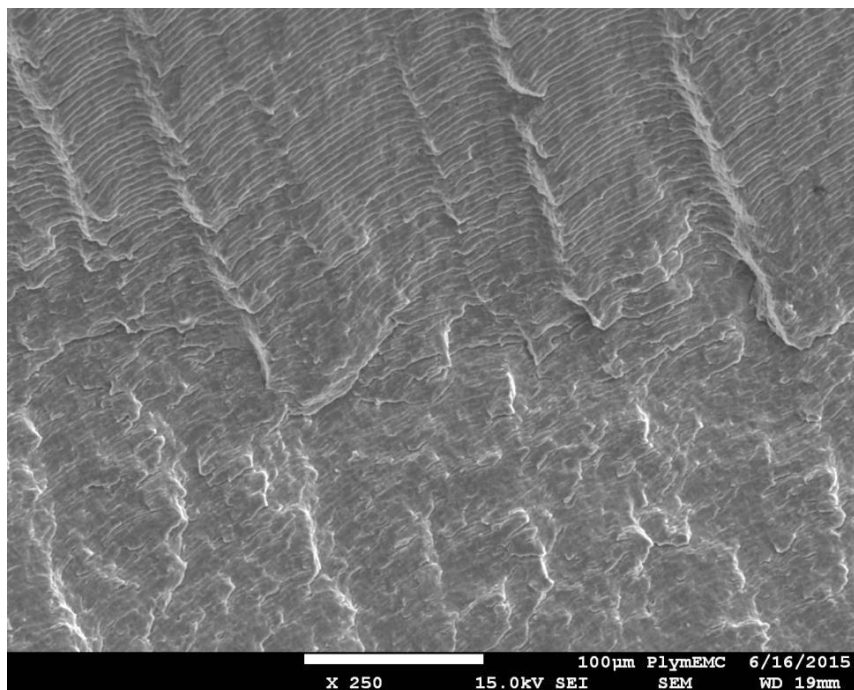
The mechanism of fatigue crack growth was by ductile striation formation; this image shows the fracture surface on tensile fatigue specimen W130 and the crack growth direction is from the bottom of the image to the top.
